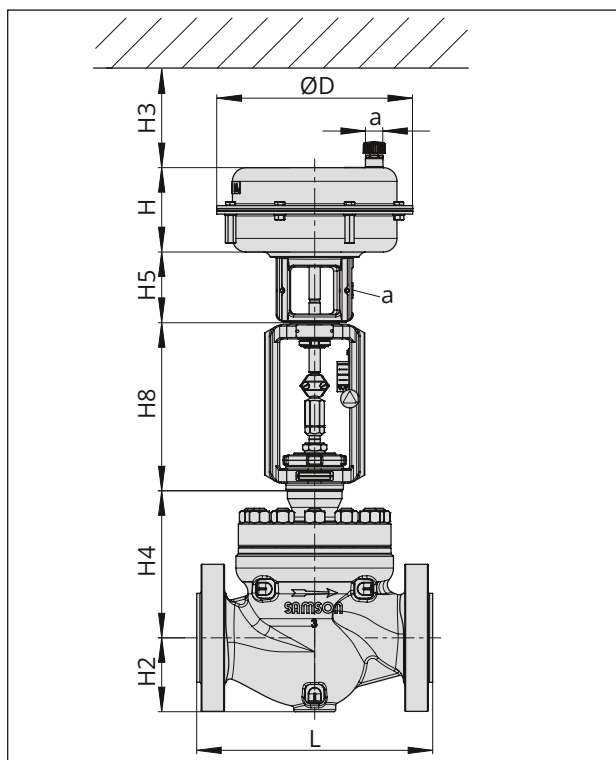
SMS MG-7 Control Valve: Type 251GR Valve with Type 3277 Pneumatic Actuator
